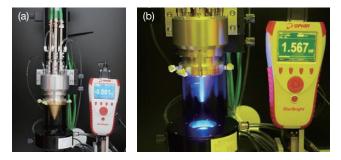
Multi-beam processing head using three 500 W blue diode lasers has been developed. (a) Processing head (b) Laser output
